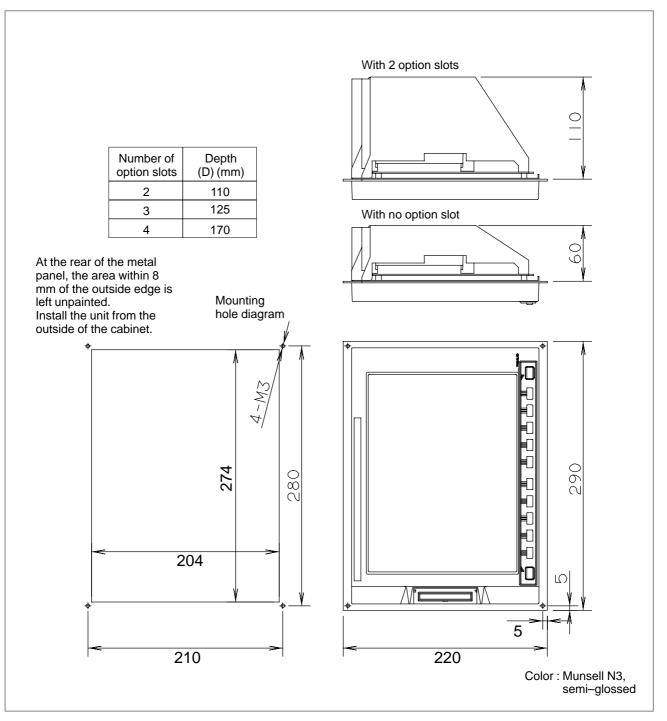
External dimensions of 10.4" LCD-mounted type CNC control unit
